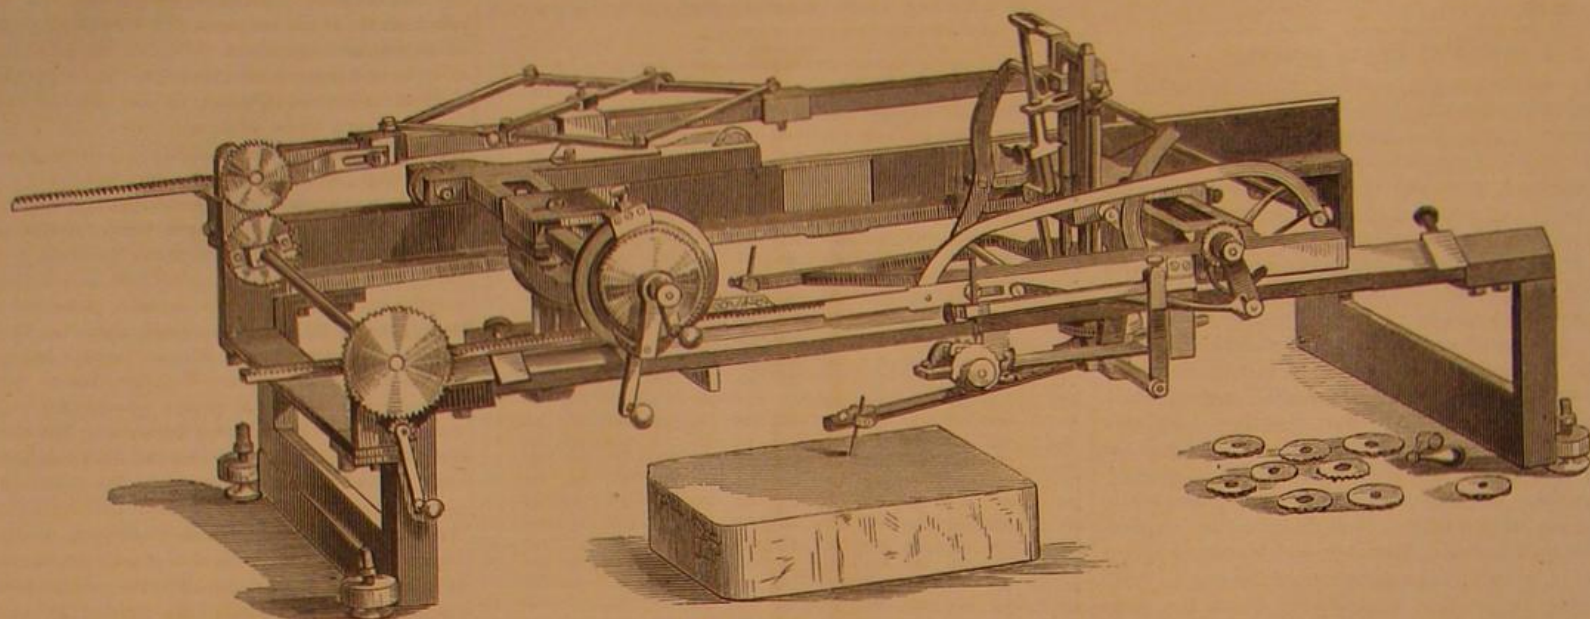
LOTZ' ENGRAVING MACHINE.
